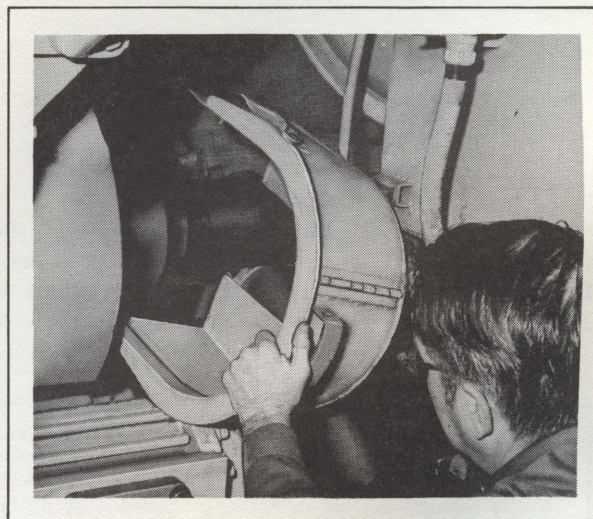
LONG SHAFT ENGINE TO COMPRESSOR GUARD.
